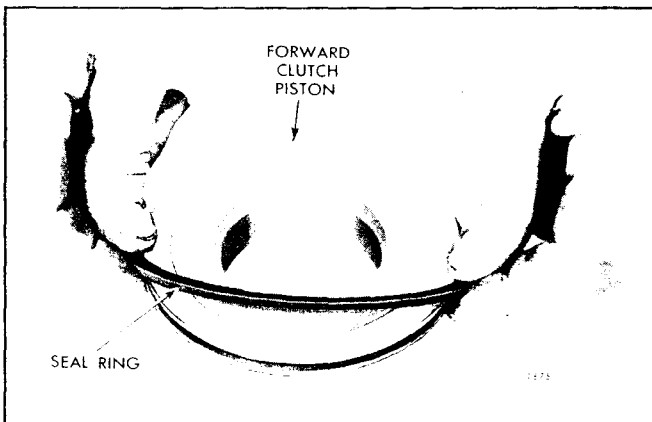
Installing Forward Clutch Piston Seal Ring on Piston
